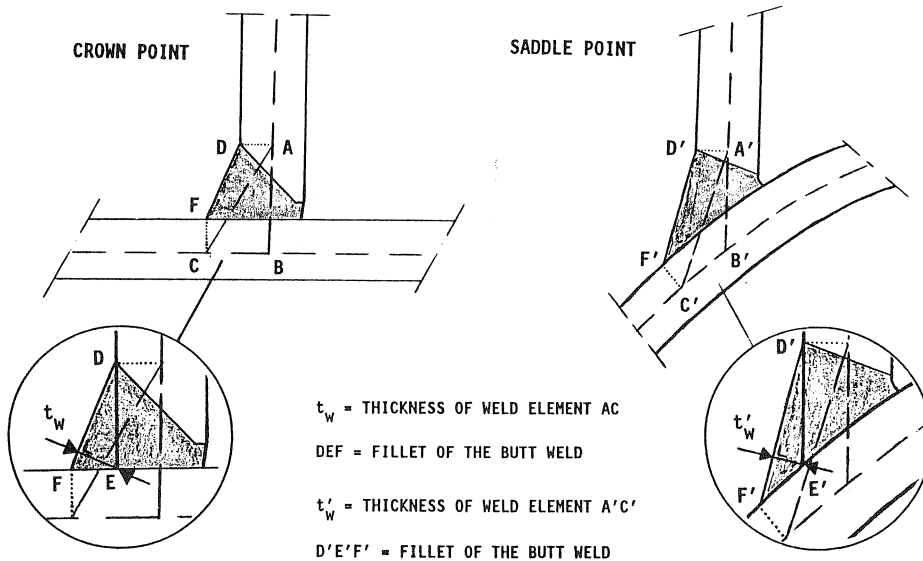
Numerical modelling of the weld geometry.
